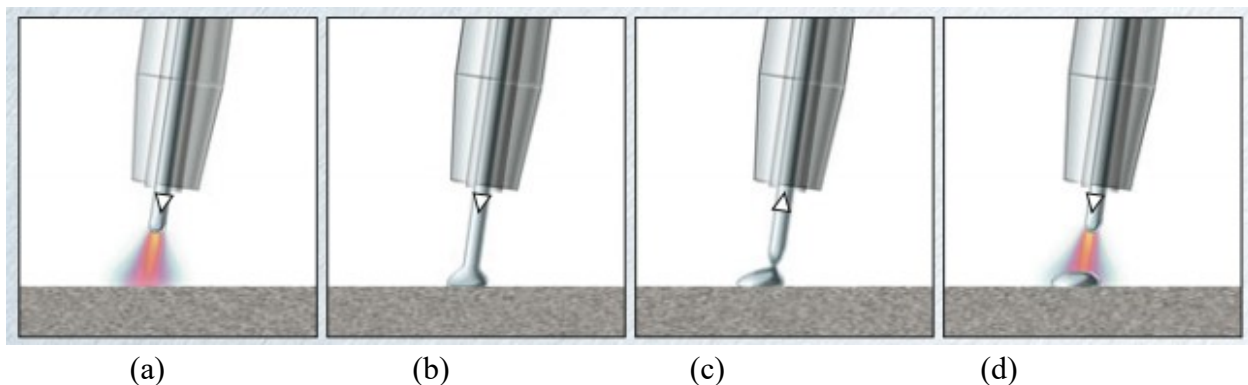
Demonstration of CMT welding arc [Merkler M. (2004)]
